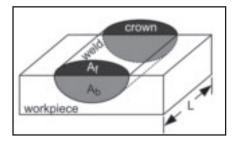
Schematic showing a section of the weld (L), the area representing the contribution of the base metal to the weld metal  $(A_b)$ , and the area representing the contribution of the filler metal to the weld metal  $(A_f)$ , that is, the transverse cross-sectional area of the crown.
